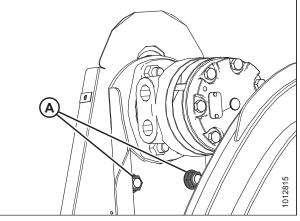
Single-Reel Drive Shown – Double Reel Similar
